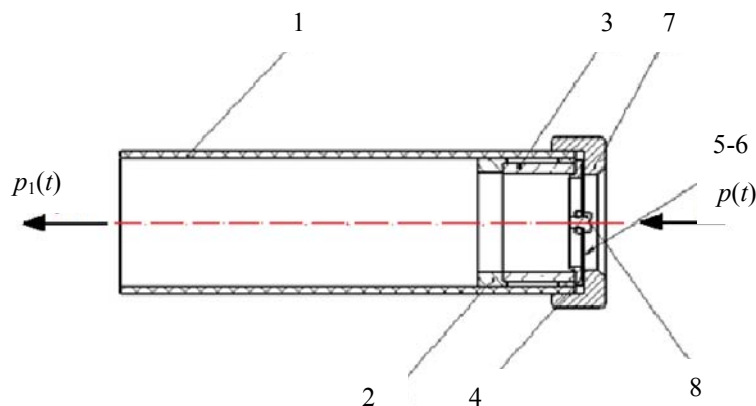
The flow control device: 1 – cylindrical body; 2 – mounting ring; 3 – piezoelectric actuator (cylinder); 4 – mounting ring of the plate with a pad; 5 – plate; 6 – plate; 7 – threaded mounting ring; 8 – center tab
